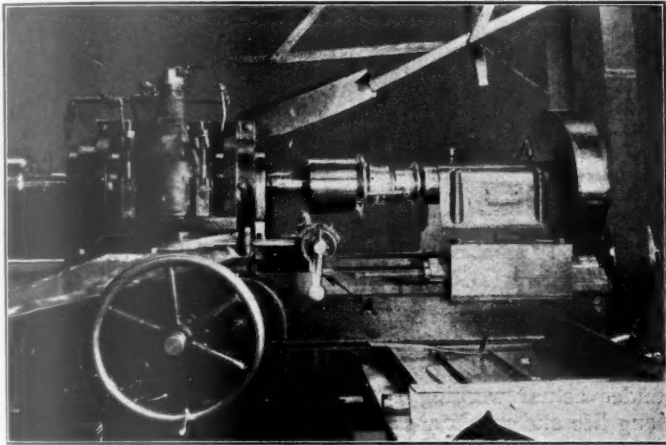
Front View of Heavy Two-Head Boring, Facing and Tapping Lathe Equipped with Oilgear Feed Control
